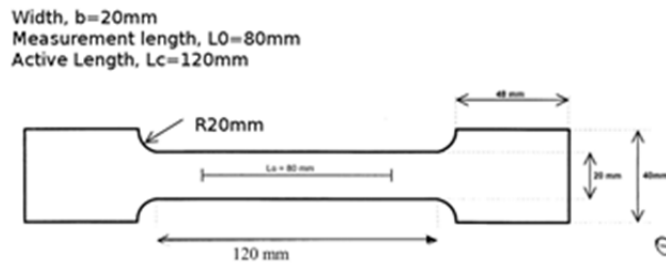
Test specimen used for the tensile testing in TWIP4EU
